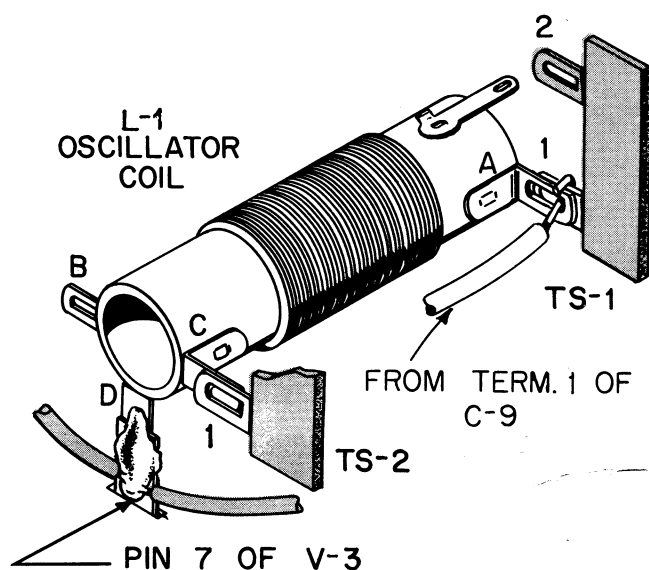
MOUNTING THE OSCILLATOR COIL
